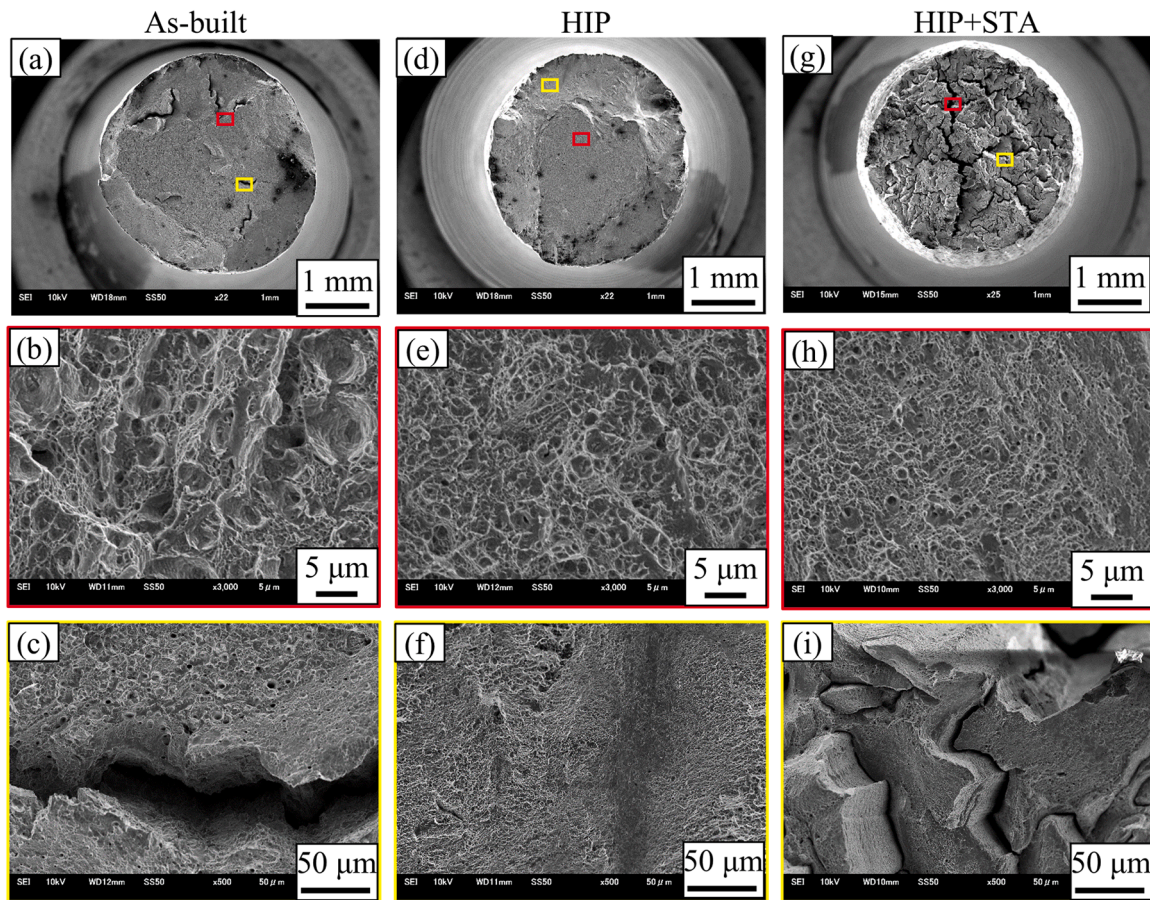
SEM images of fracture surfaces after tensile testing at RT. (a–c) As-built, (d–f) HIP, and (g–i) HIP+STA specimens.
